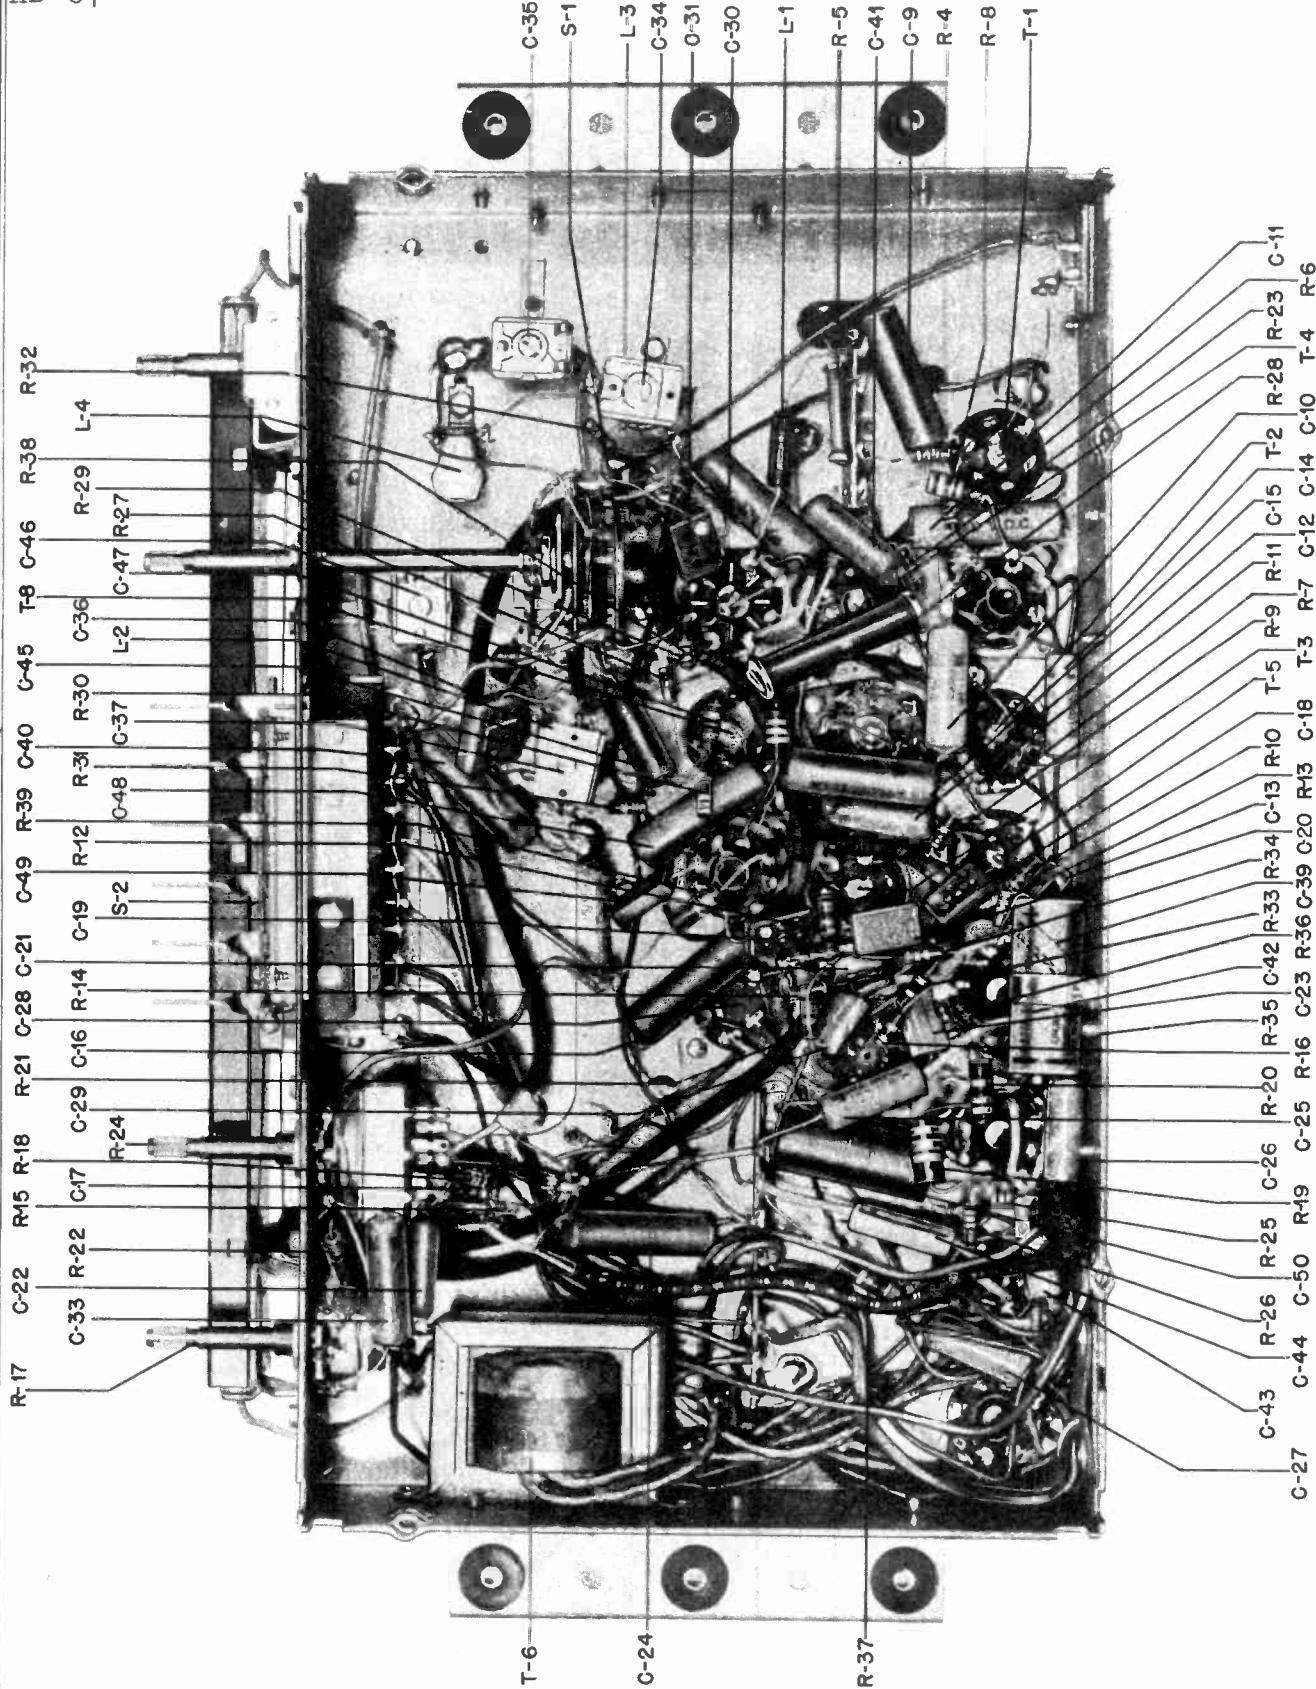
PARTS LOCATION - CHASSIS HS-87, BOTTOM VIEW
